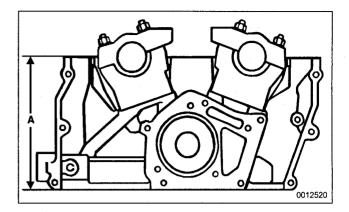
Front view of cylinder head showing minimum resurfacing dimension (A).
